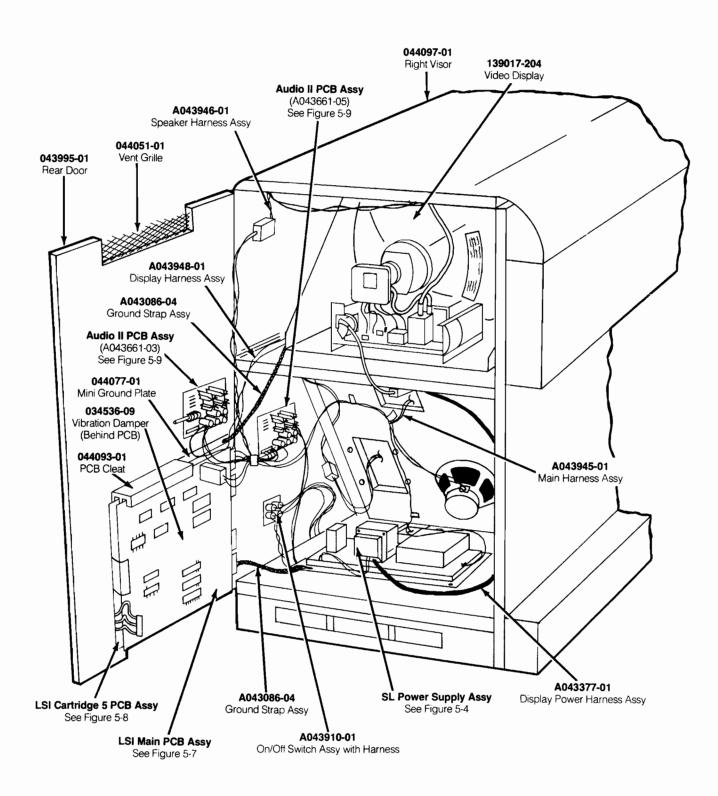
Cabinet-Mounted Assemblies, Continued A044213-01 B
